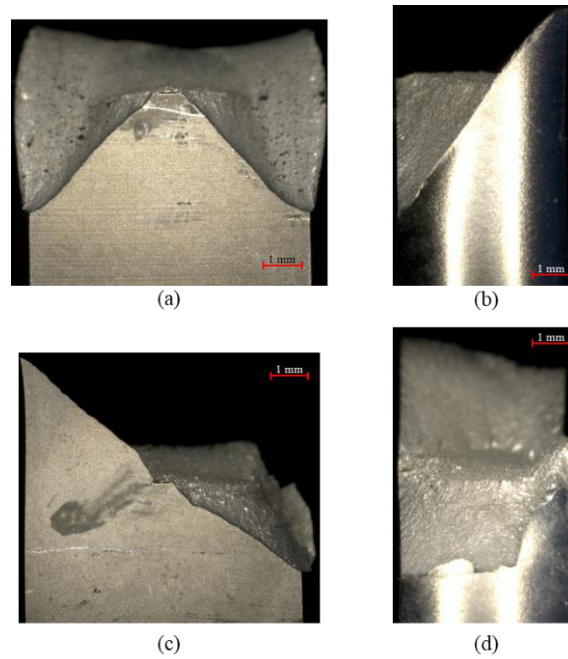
Geometries of the uniaxial specimen after fracture: (a) symmetric fracture form viewed from the surface with notch; (b) view from the right of (a); (c) asymmetric fracture form viewed from the surface with notch; (d) view from the right of (c).
